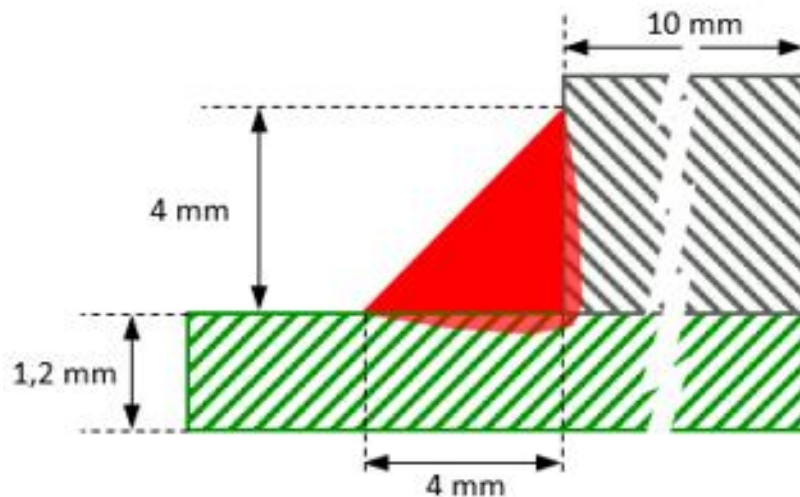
Detail of the welded joint with the minimum dimensions of the weld deposit. The green area represents the pipe and gray area the flange (see Fig. 1).
